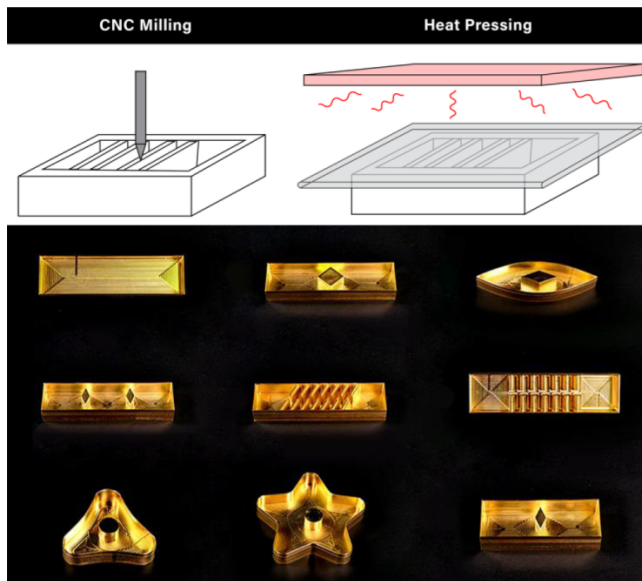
(top). two steps fabrication process: CNC milling of desired pattern on a block of bronze and heat pressing of a PVC film on the bronze mold (bottom) nine CNC-milled bronze molds.
